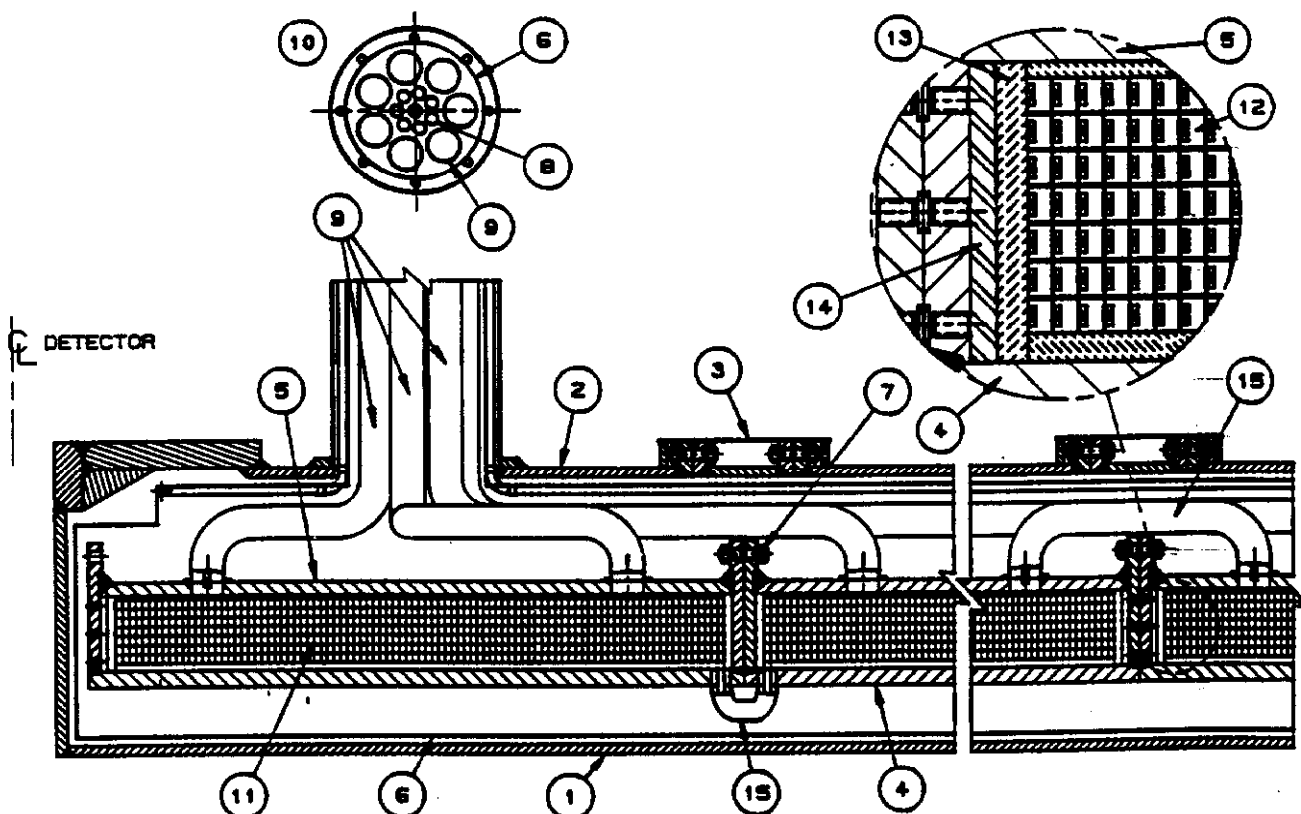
Axial cross section of coil, helium and vacuum vessels: 1, inner and 2, outer, vacuum shells; 3, assembly joint (if required); 4, inner and 5, outer helium vessel shell; 6, radiation shield; 7, coil module attachment; 8, liquid helium supply pipe; 9, helium return/vent pipe; 10, chimney to storage dewar; 11, coil winding; 12, conductor; 13, G-10 insulation; 14, axial preload bar; 15, electrical interconnect pipe.
